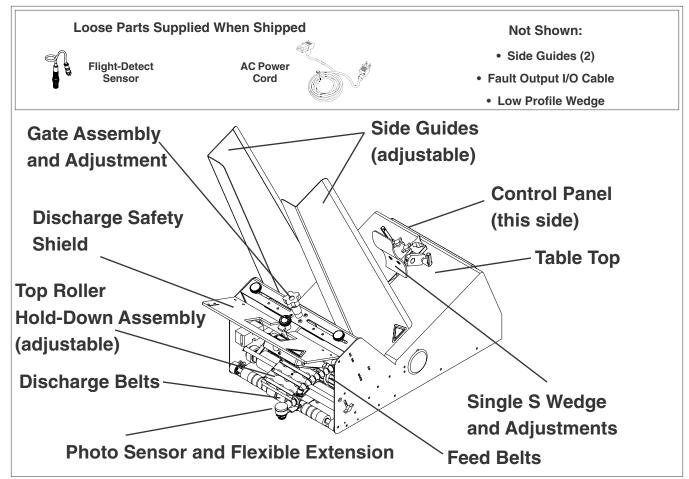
Main Assemblies of the Reliant 3700 Universal Friction Feeder
